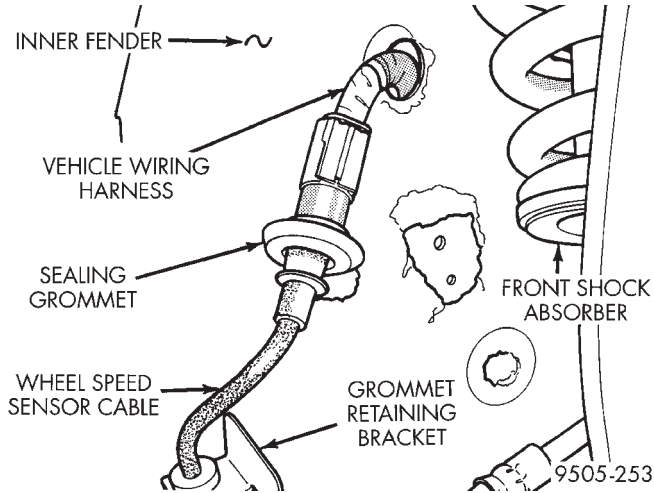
Wheel Speed Sensor Cable Connection To Vehicle Wiring Harness
